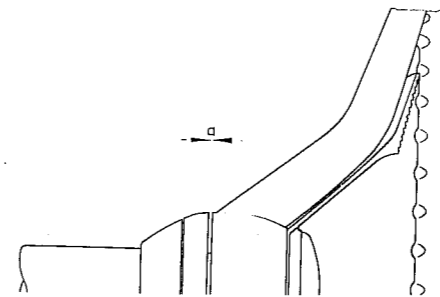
Correct clearance between steering wheel hub and indicator switch.
